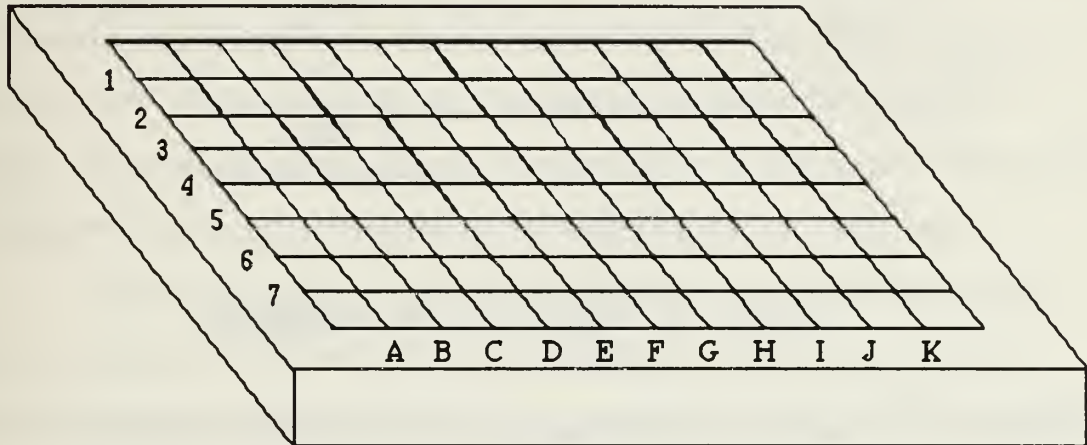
Aluminum Test Structure. The area under the grid was machined out to form a 0.794 cm (0.3125 in) plate.
